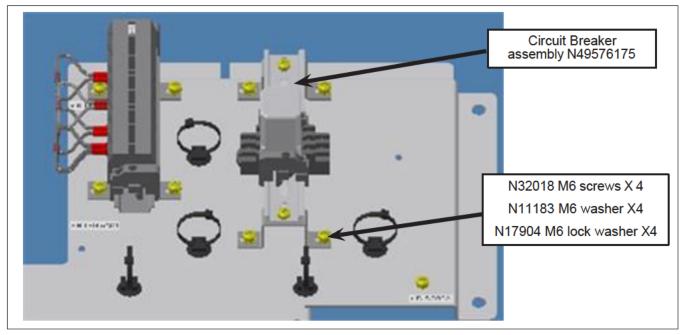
N49576175 Circuit Breaker Assembly Installation
